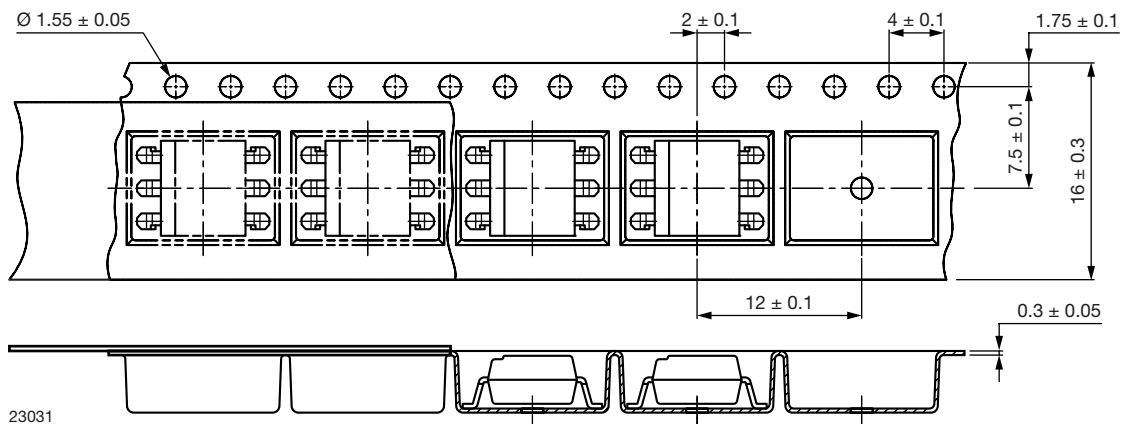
Tape and Reel Packaging (1000 pieces on reel)
